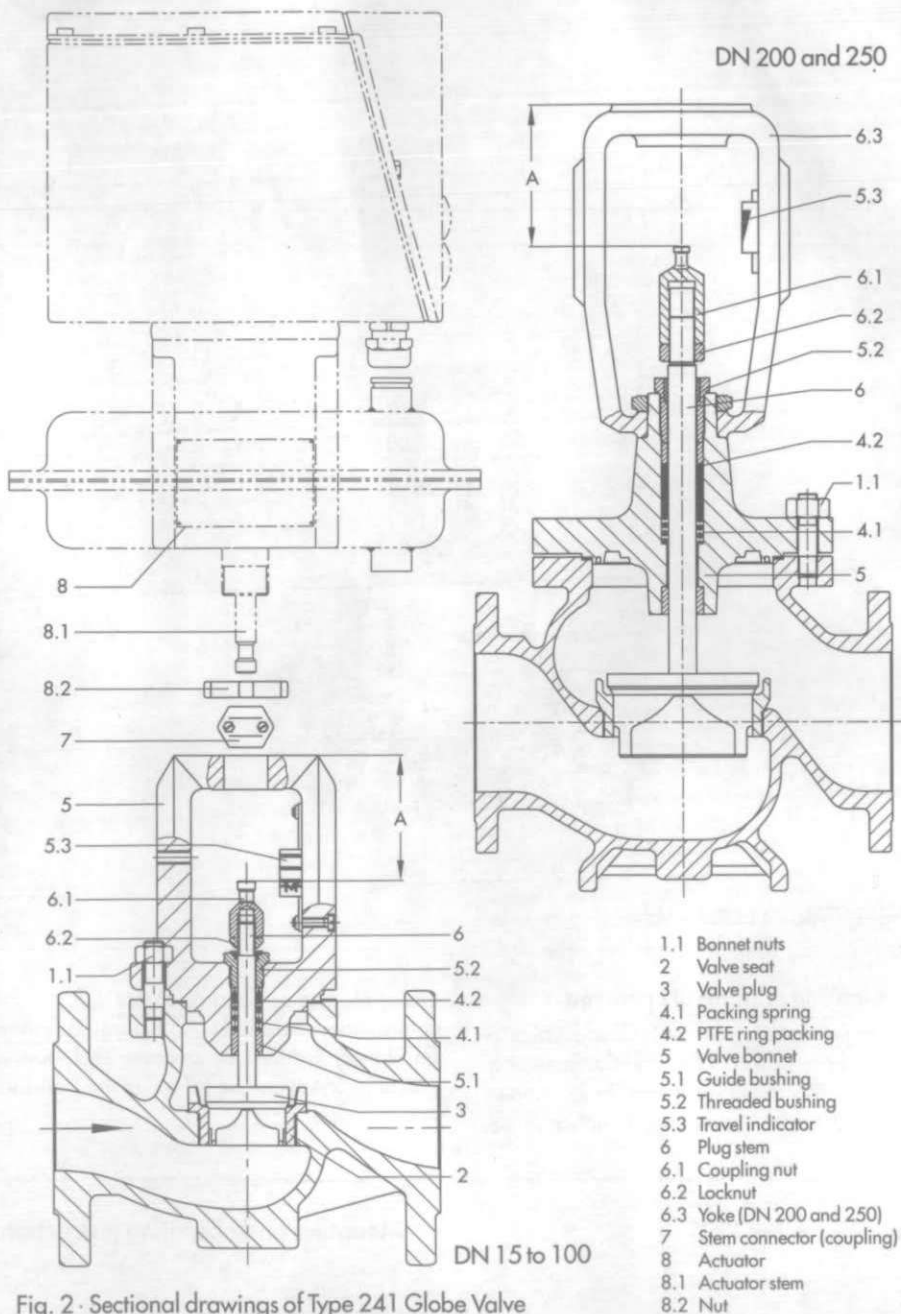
· Sectional drawings of Type 241 Globe Valve
